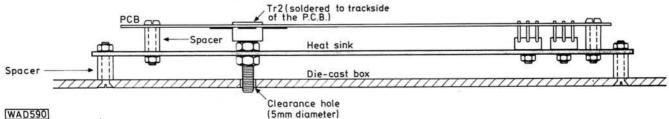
Side view of completed p.c.b. and heatsink assembly. The clearance hole shown should be 5mm diameter
